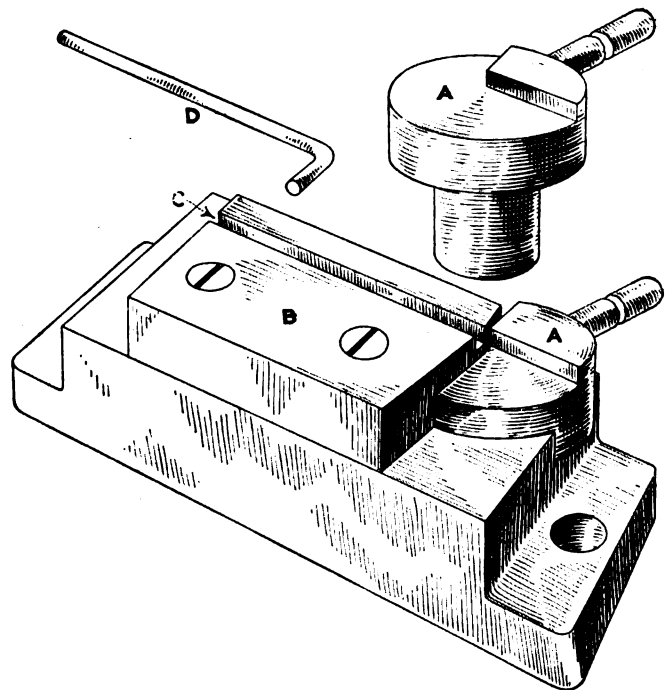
BRAKE FOR BENDING WIRE AT AN ANGLE
